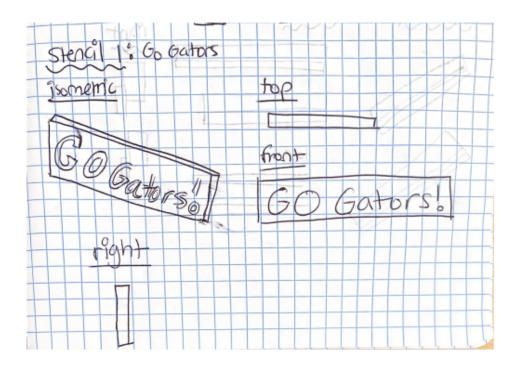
Drawings of Stencil 1 "Go Gators!" design, including isometric, top, front, and right views
